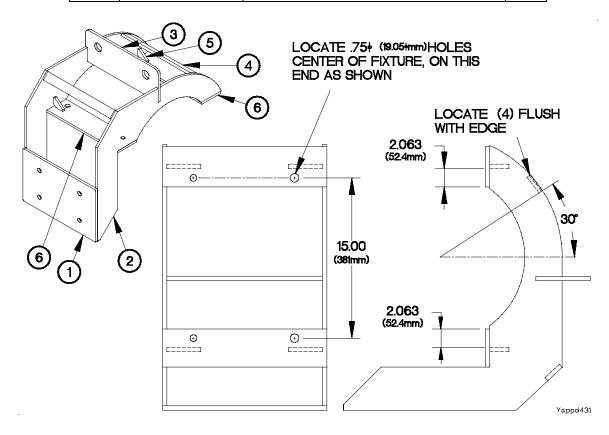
Transmission Lift and Mounting Bracket Assembly
